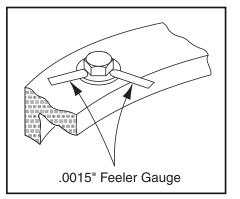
Swing Bearing Bolt Feeler Gauge Check
